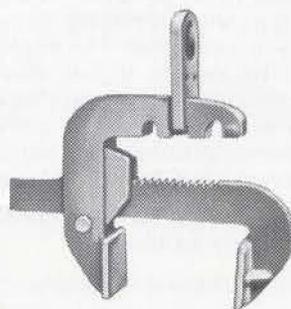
RATCHET TONG — Close adjustment to the load over the full range of tong opening — Lifting eye adjustable to balance load — Powerful grip — Suitable for handling boxes, timbers, bars, structural shapes, etc.
